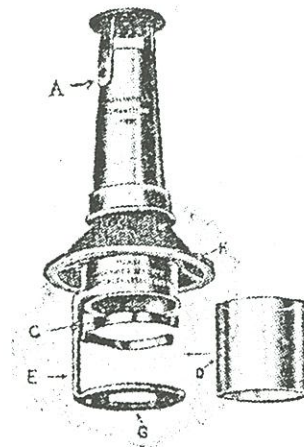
HAILWOOD COMBUSTION TUBE LAMP FITTINGS.
